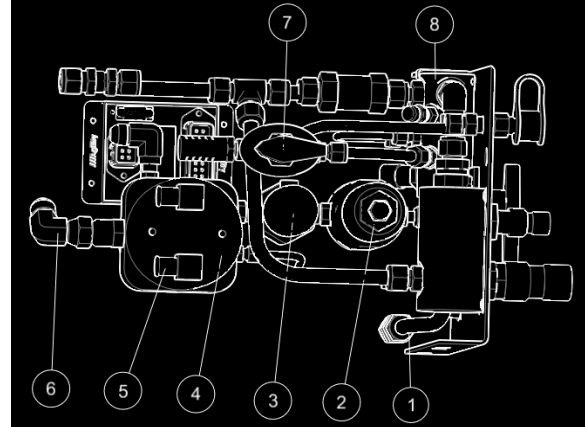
FMM Components, Overhead View: The Defuel Valve is Usually Located Inside the FMM
